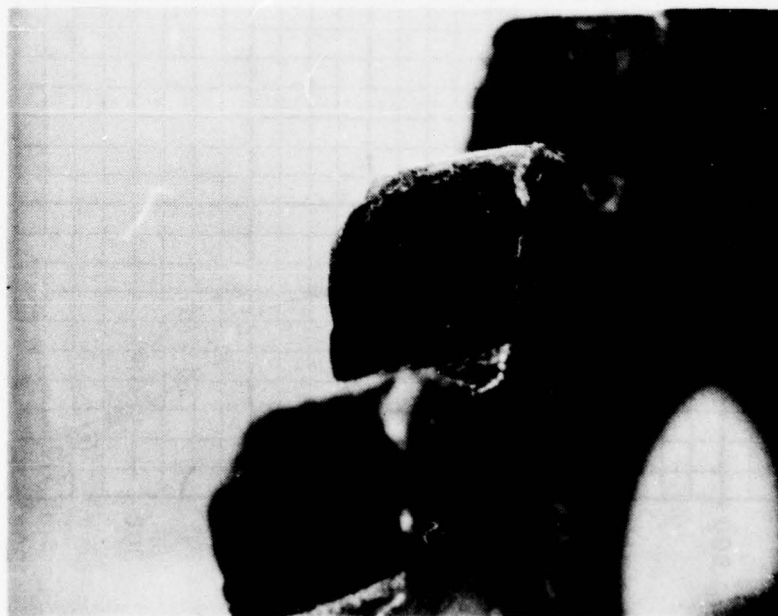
Fan accessory gear teeth (drive side) after 7-minute loss-of-lube test of transmission number 1.
